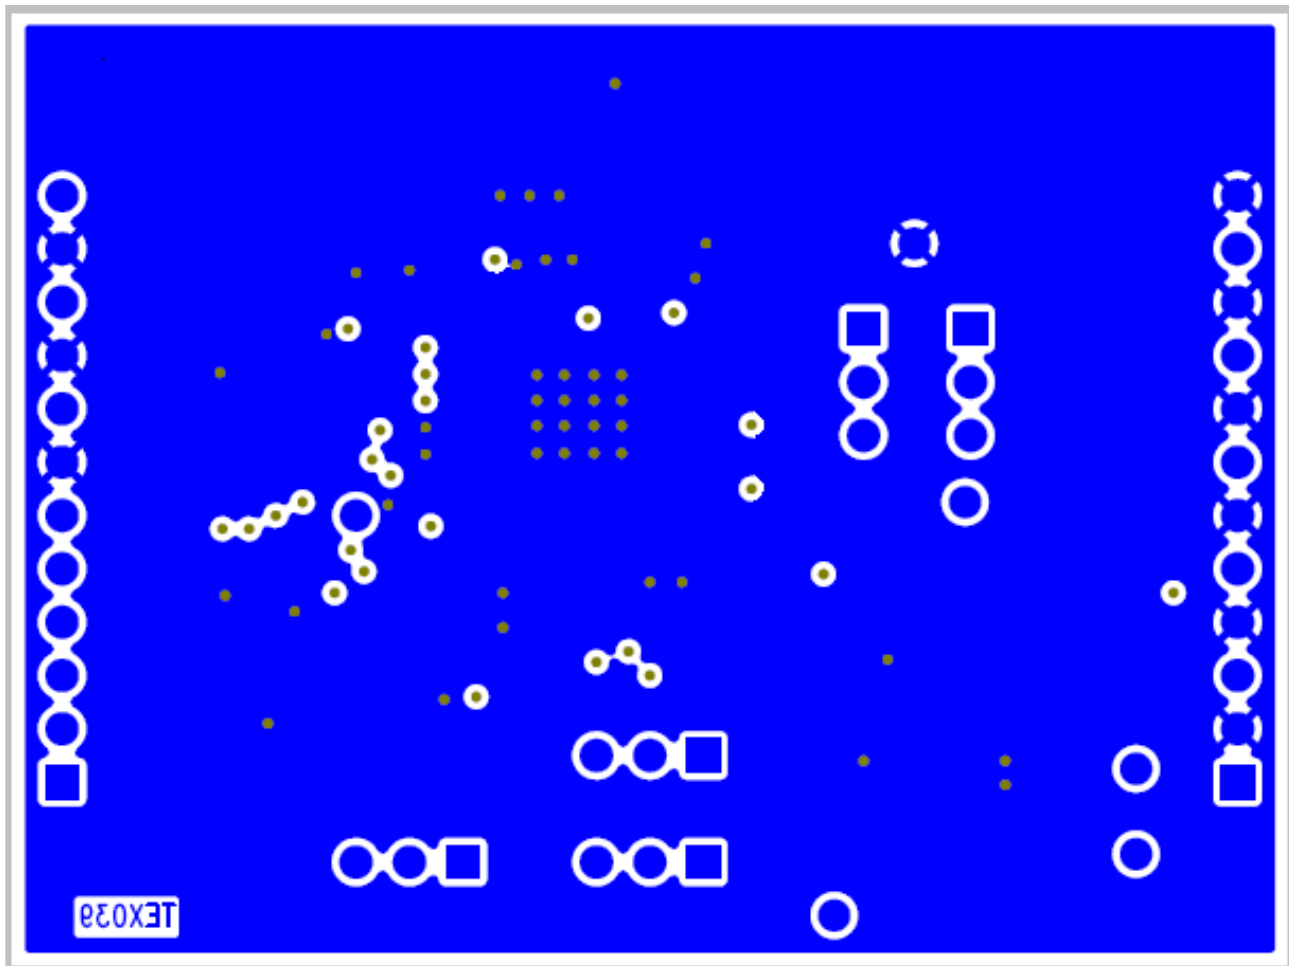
Bottom Side of PCB Layout used in TMDSPCKIT-V3 PLC Evaluation Kit
